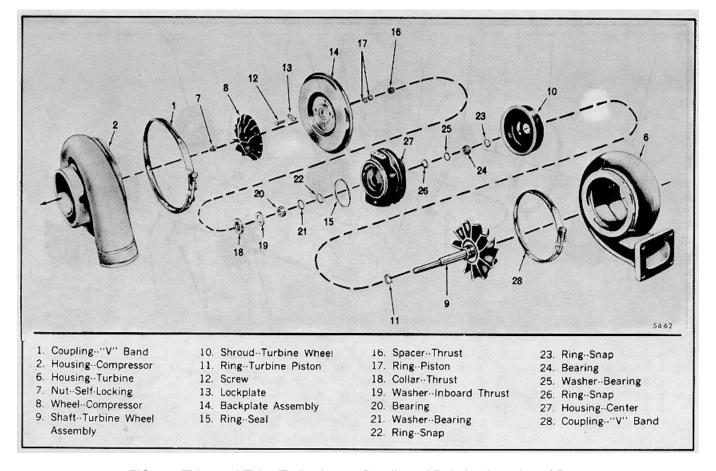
TV71 and TV81 Turbocharger Details and Relative Location of Parts
